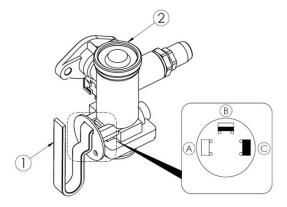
The control valve and brake-force-control system for 2-line pneumatic brakes
